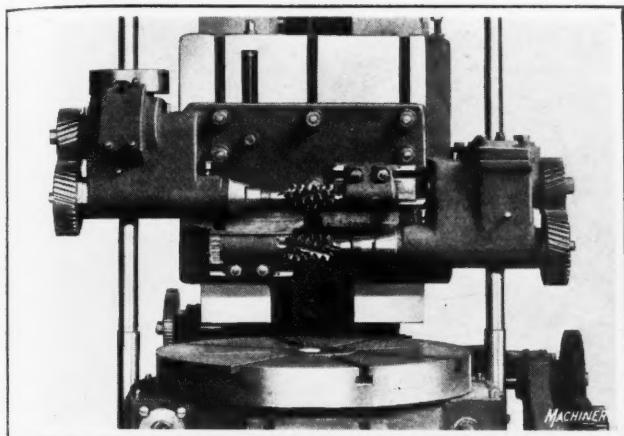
Machine equipped with Two Hobs for cutting Right-and Left-hand Sections of a Herringbone Gear simultaneously
